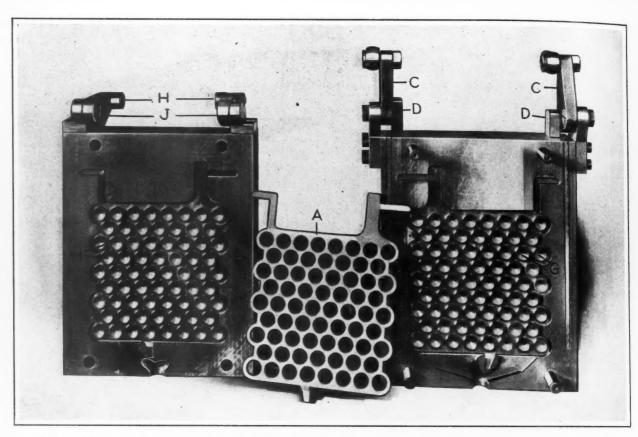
Movable and Stationary Dies Equipped with Sixty-eight Sliding Cores Each for Producing the Holes in Battery Grid A
